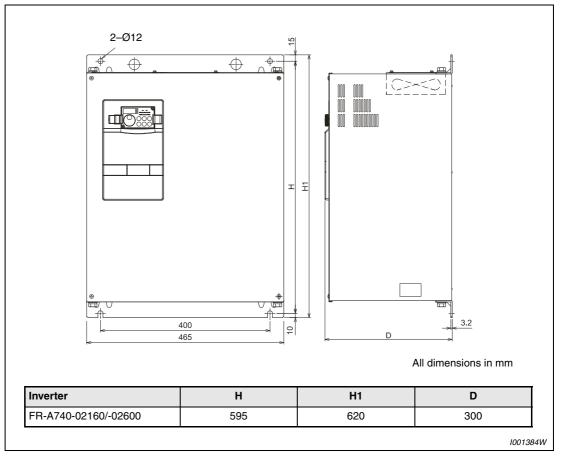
Dimensions of FR-A740-02160 and FR-A740-02600
